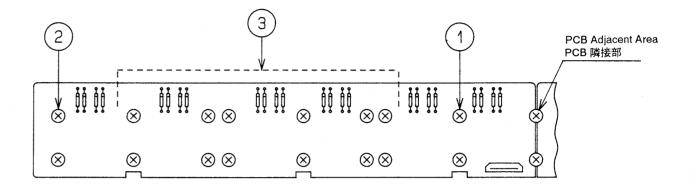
(Example: order of screwing for PCB 32P "LOW") (例 32P LOW ねじ止め順序)
